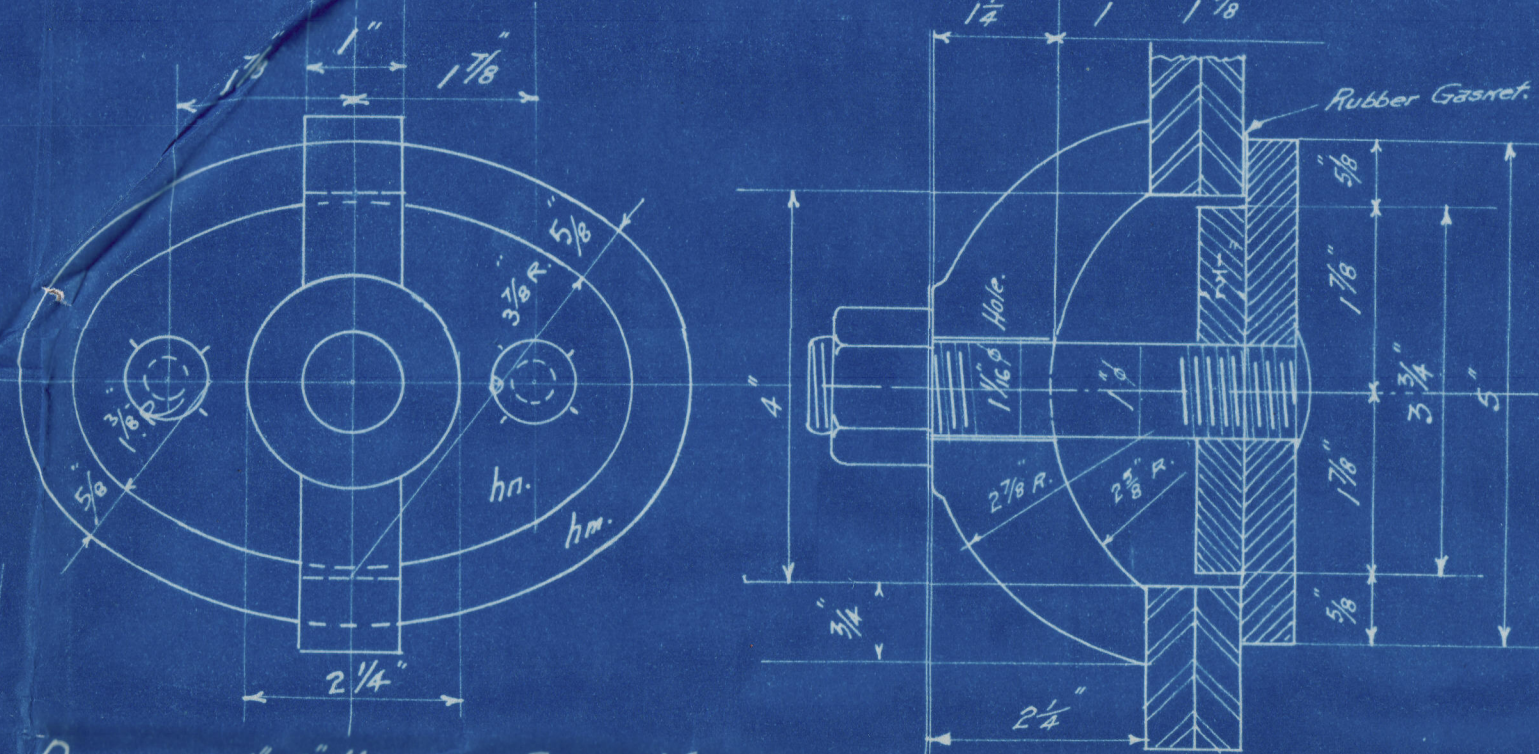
DETAIL OF DOOR & DOOR SHIELD DEVELOPED
